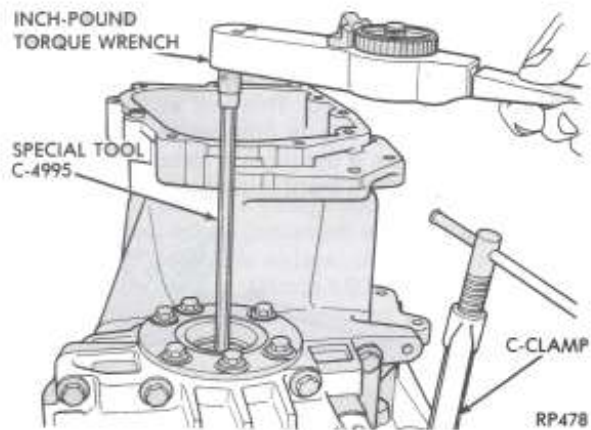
Checking Differential Bearing Turning Torque (A-520/A-555)
